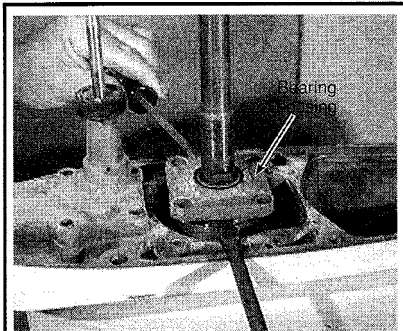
Carefully pry the bearing housing upward off the driveshaft
